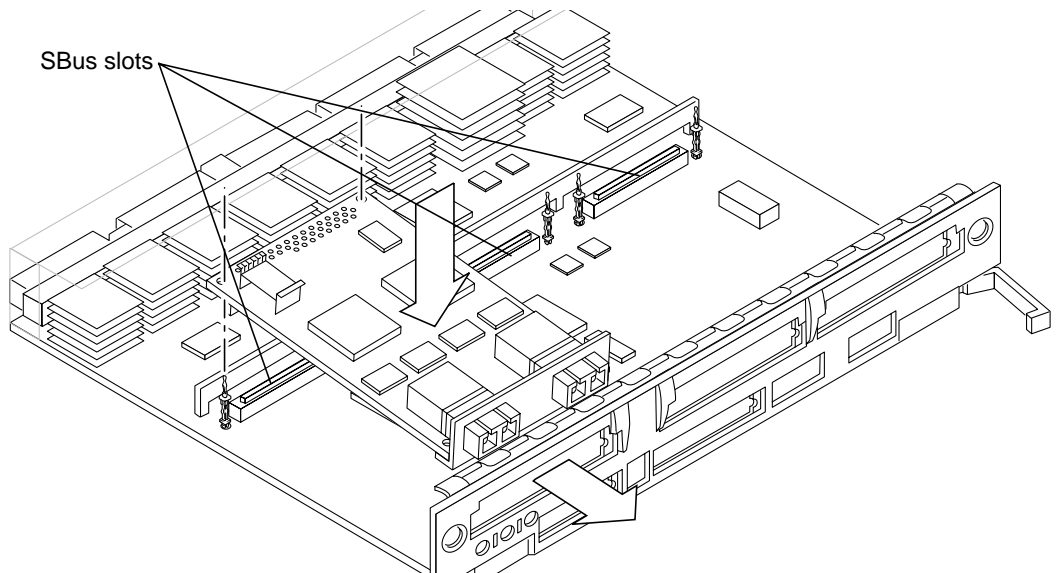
Inserting the Host Adapter in an I/O Board
